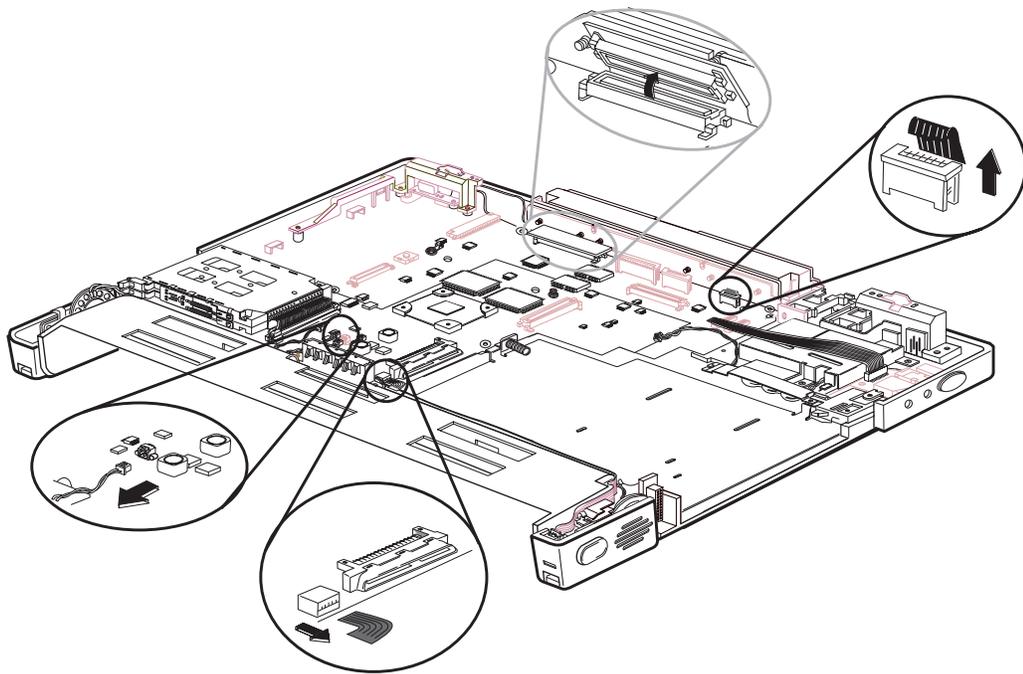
Disconnecting the I/O Panel and UMI Cables
